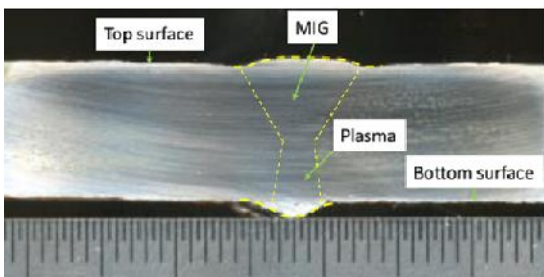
The bead cross-section of Plasma-MIG hybrid welding
